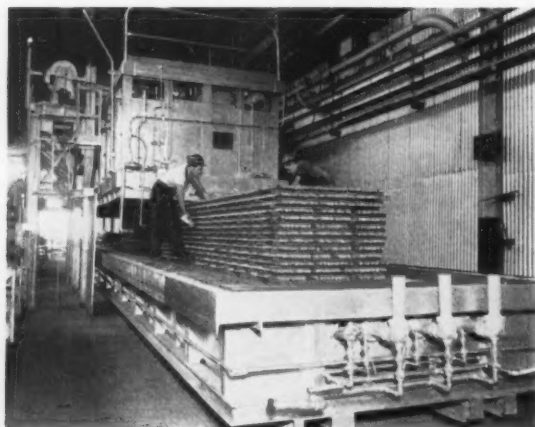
Operators adjusting spacers in typical carbon restoration—anneal charge of hot rolled bar stock. Note radiant tube burners and flexible gas and air connections in end of car. Three tubes are also located in opposite end of car.
